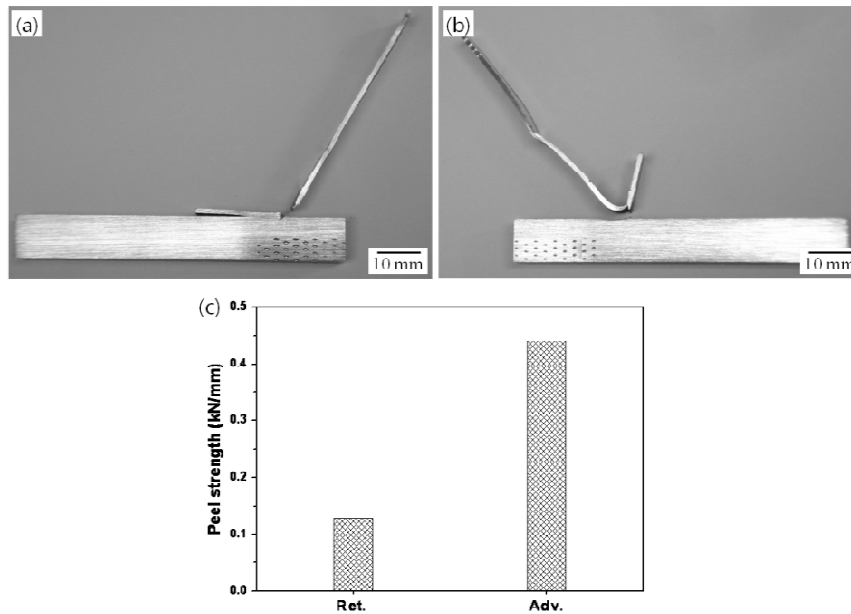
Results of peel tested lap joints. (a) top view of lap joint in which Inconel 600 is welded at advancing side, (b) top view of lap joint in which Inconel 600 is welded at retreating side and (c) peel strengths.
